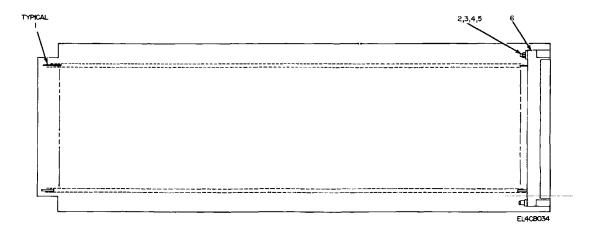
Special Tool Extender Card Assembly SMD-532026.
